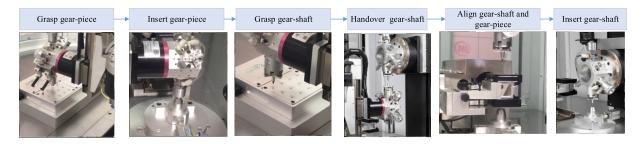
The assembly process of gear-piece and gear-shaft.
